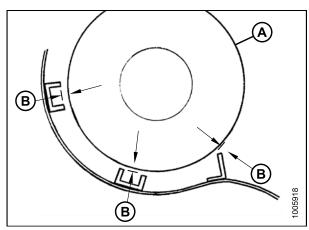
Clearance between Auger and Stripper Bars on the Auger Pan
